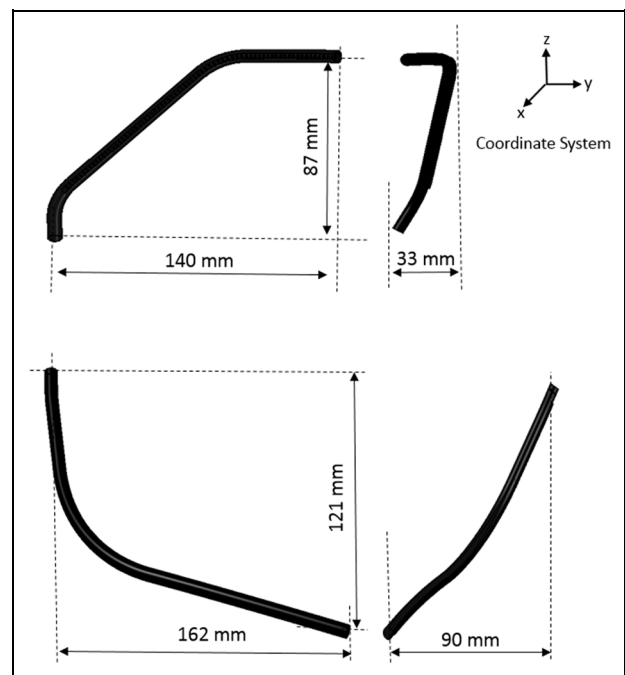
Upper and bottom light guide geometry dimensions in X, Y, Z coordinates.
